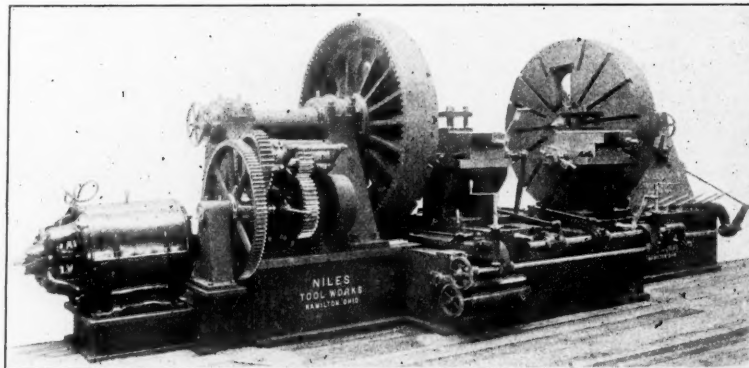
Niles-Bement-Pond 80-in. Wheel Lathe.
